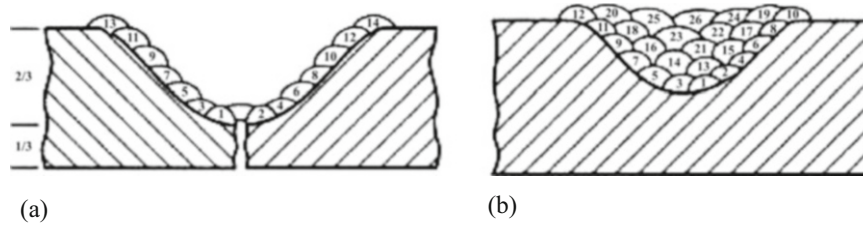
Typical repair welding of cast iron. (a) Bridging crack by weld bead from buttered layers. (b) Sequence of repair welding deposit
